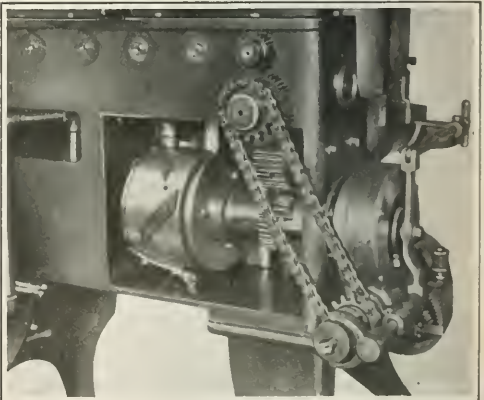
View of Cam-shaft and Drive to Pump on Machine shown in Fig. 4
